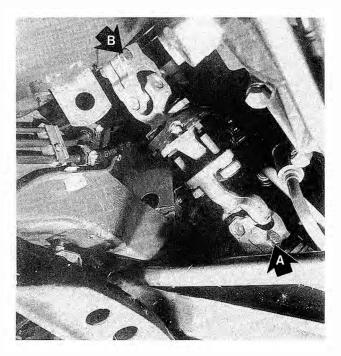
Steering universal joint shaft with universal joints and rubber coupling. Lower bolt (A) fits in slot on steering gear pinion shaft and must be completely removed. Loosen upper bolt (B) to aid removal of universal joint shaft.
